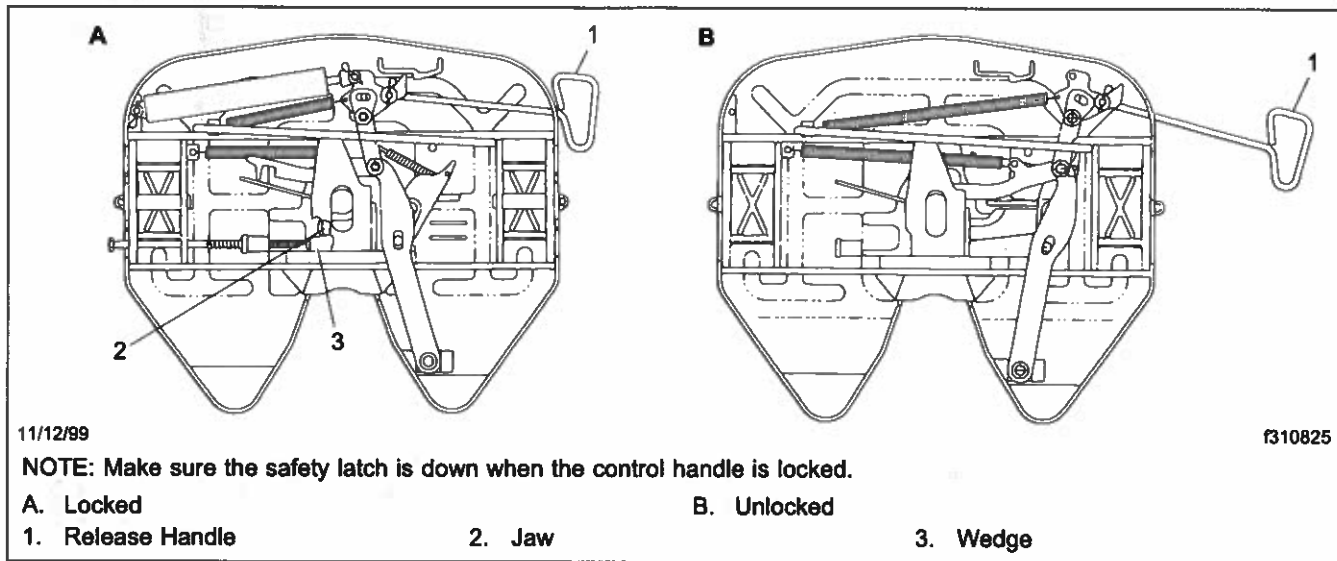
, Fontaine 6000/7000 Series Fifth Wheel, Locked and Unlocked (bottom view)
